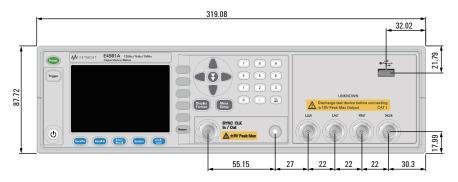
Dimensions (front view, without handle and bumper, in millimeters, nominal)
